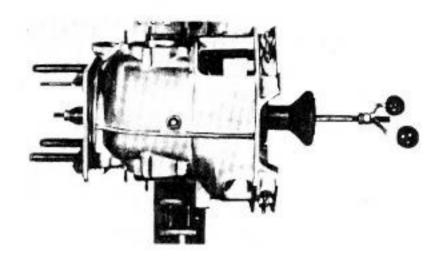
Pulling differential carrier. The slide hammer held in the pinion with the long threaded shaft can also be used to lift the carrier from the housing.
